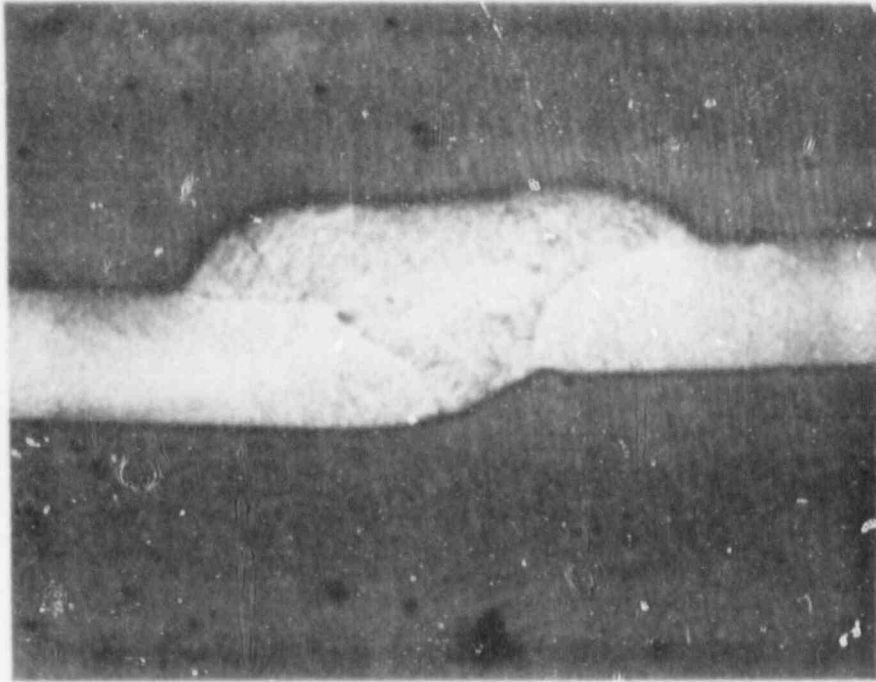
Cross-section of weld between cylinder sections (vertical position 10x)
